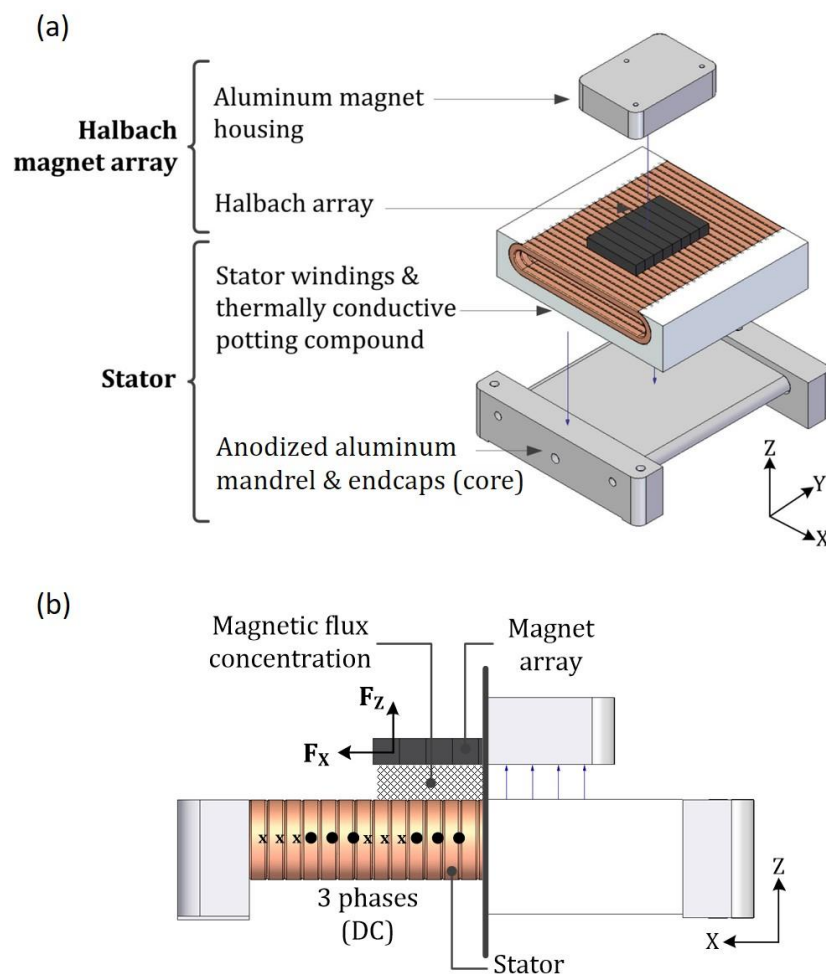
Exploded (a) and lateral (b) view of a Halbach linear motor [17].
